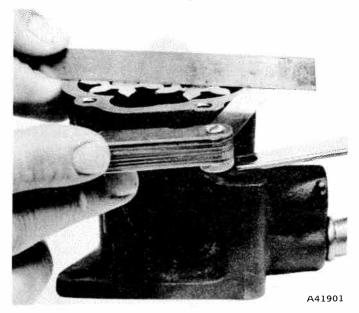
A-32 Oil Pump Gear End Clearance Measurement
